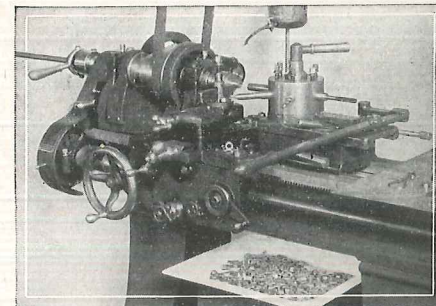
Screw cutting lathe fitted with a hand lever turret for machining small gear blanks.
